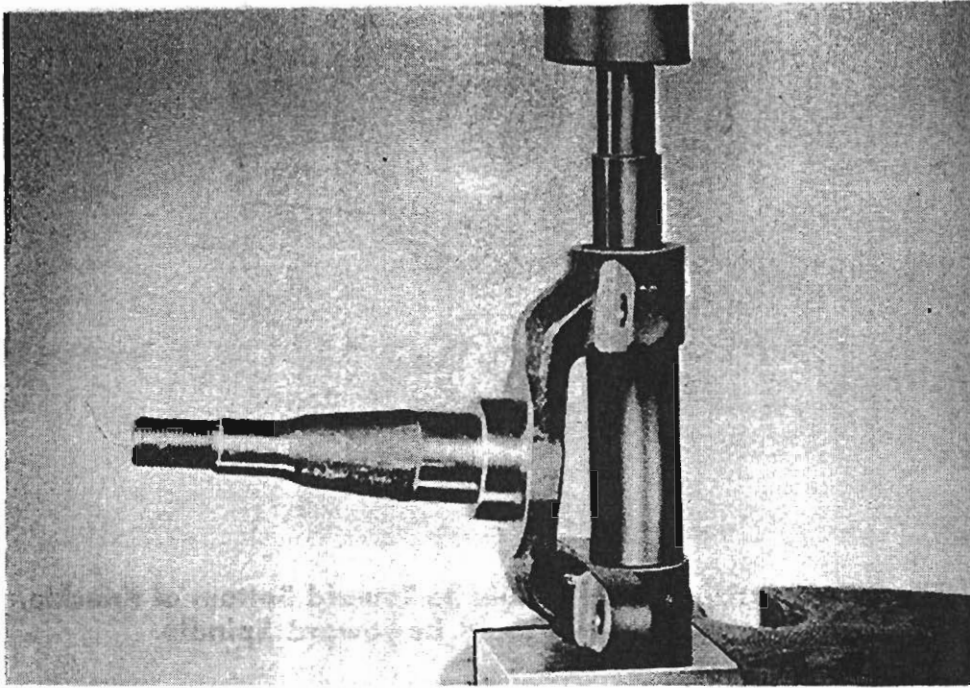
Press the Lower Bushing Out of the Knuckle. Note the Spacer in the Knuckle to Prevent Distortion.
